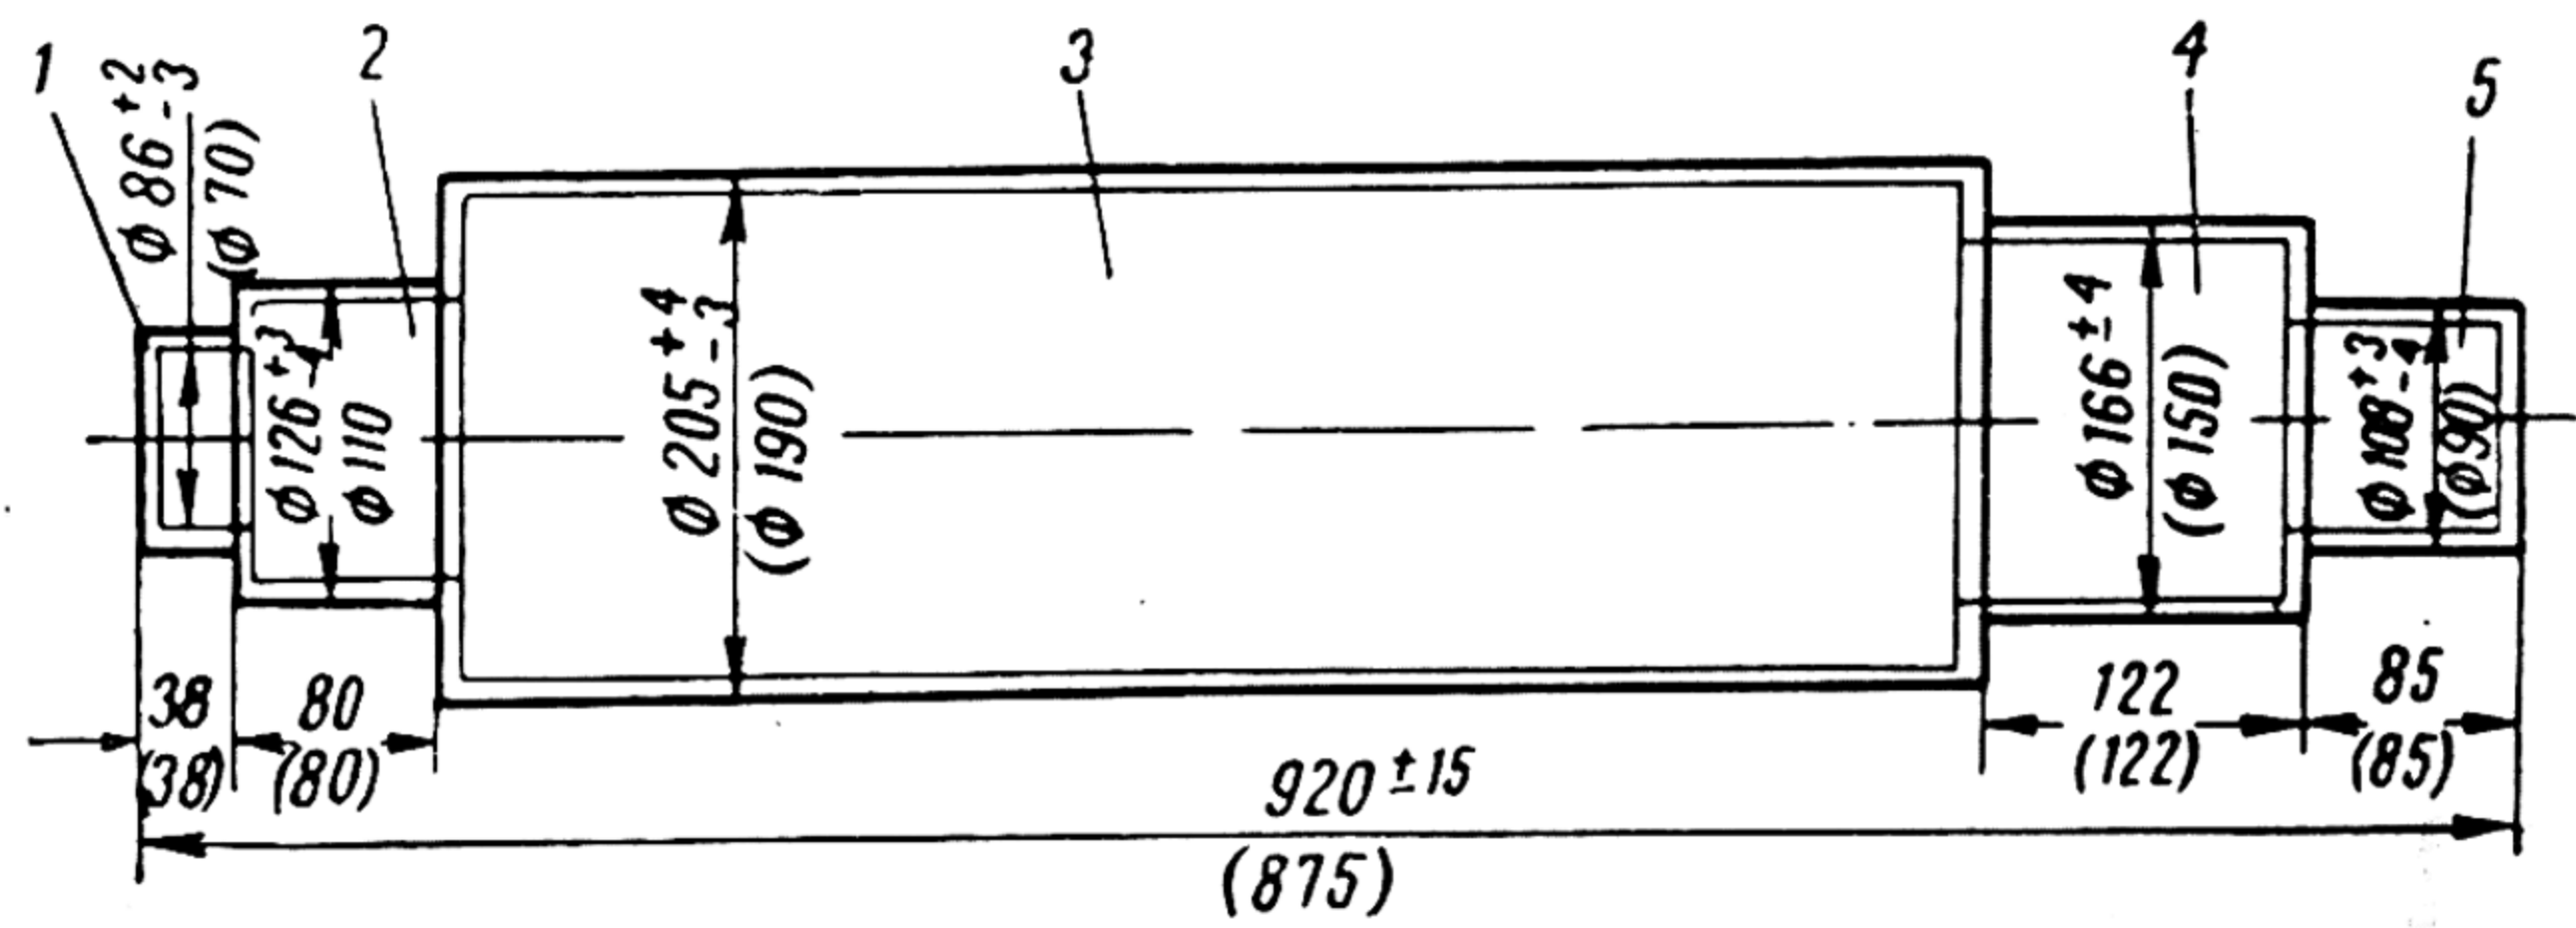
Forging drawing of shaft, shown in Fig. 141
